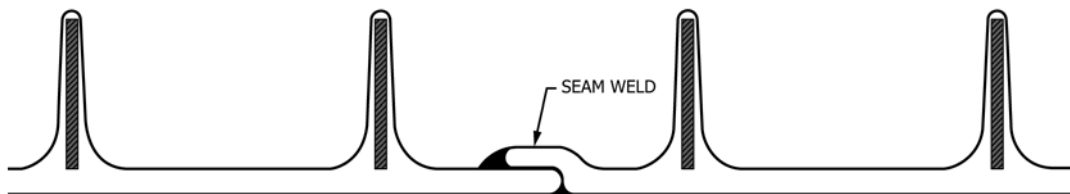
Typical Profile of Steel Reinforced Thermoplastic Pipe Profile
